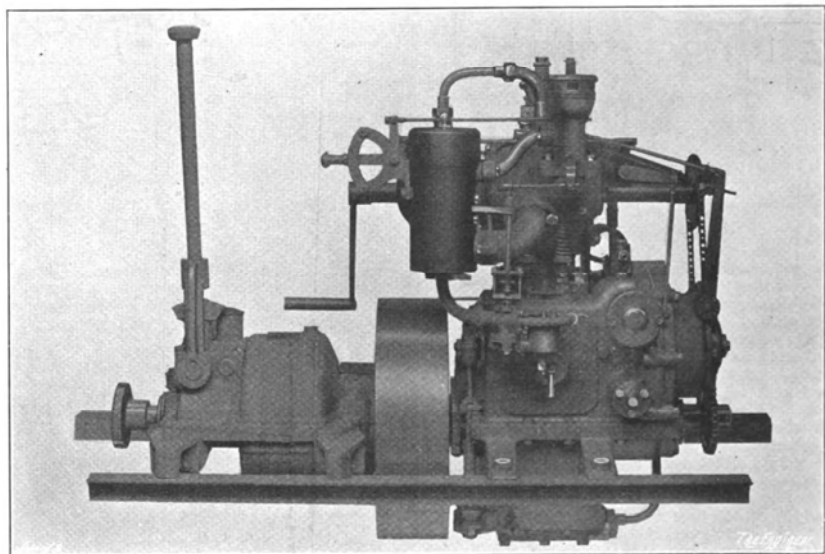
SINGLE CYLINDER 7 H.P. MUMFORD MOTOR
